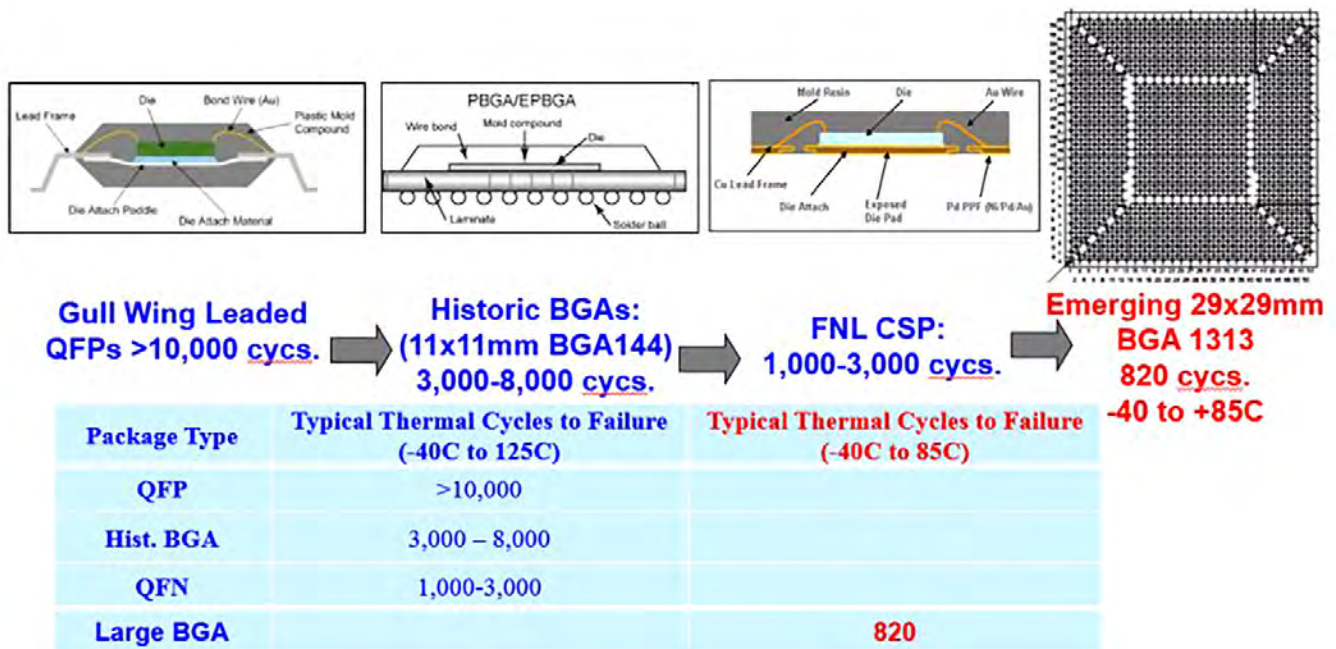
Comparative IC package thermo-mechanical cycling solder fatigue durability.
